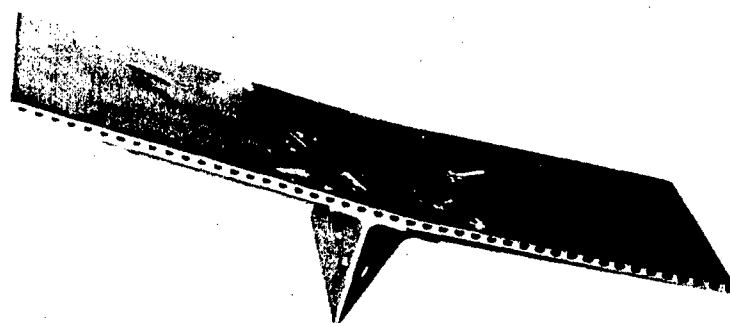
Test Article After Failure. Inner Face Sheet Undamaged.
